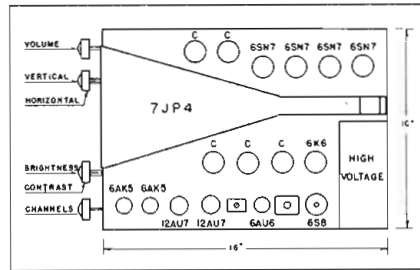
Top view of chassis showing tube layout, kinescope and operating controls
